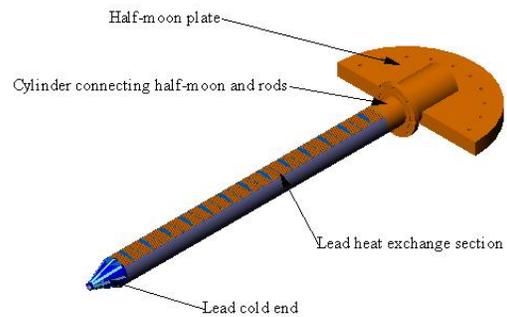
Assembled power lead without G-10 insulation sheet wrapped before inserted into the helium vessel.
